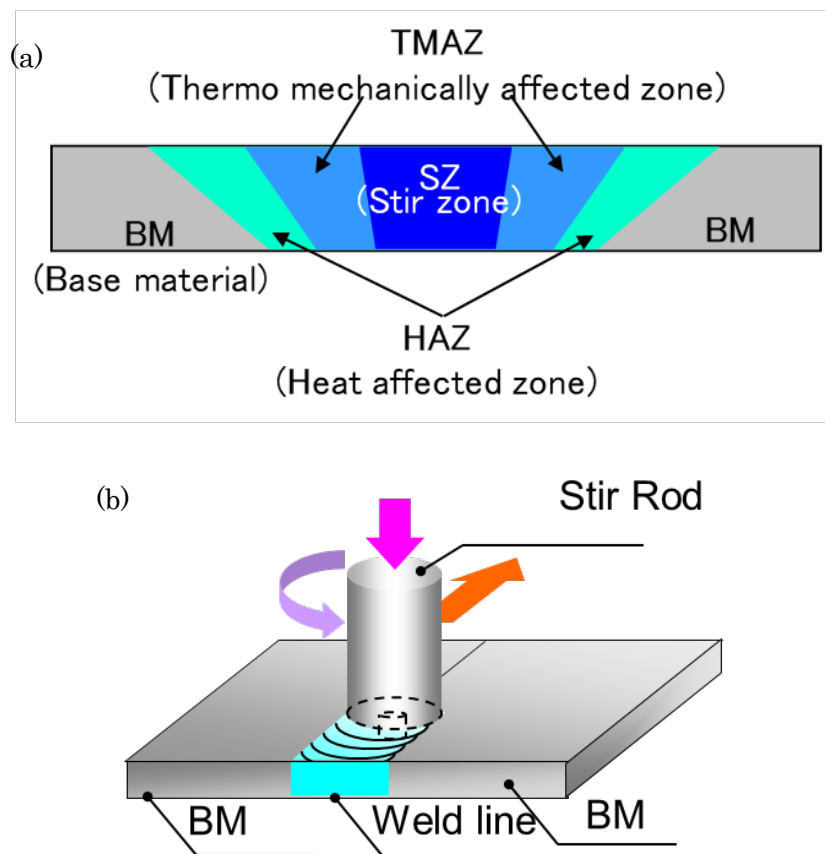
Friction stir welding (a) Section of friction stir welding, (b) Schematic of friction stir welding
